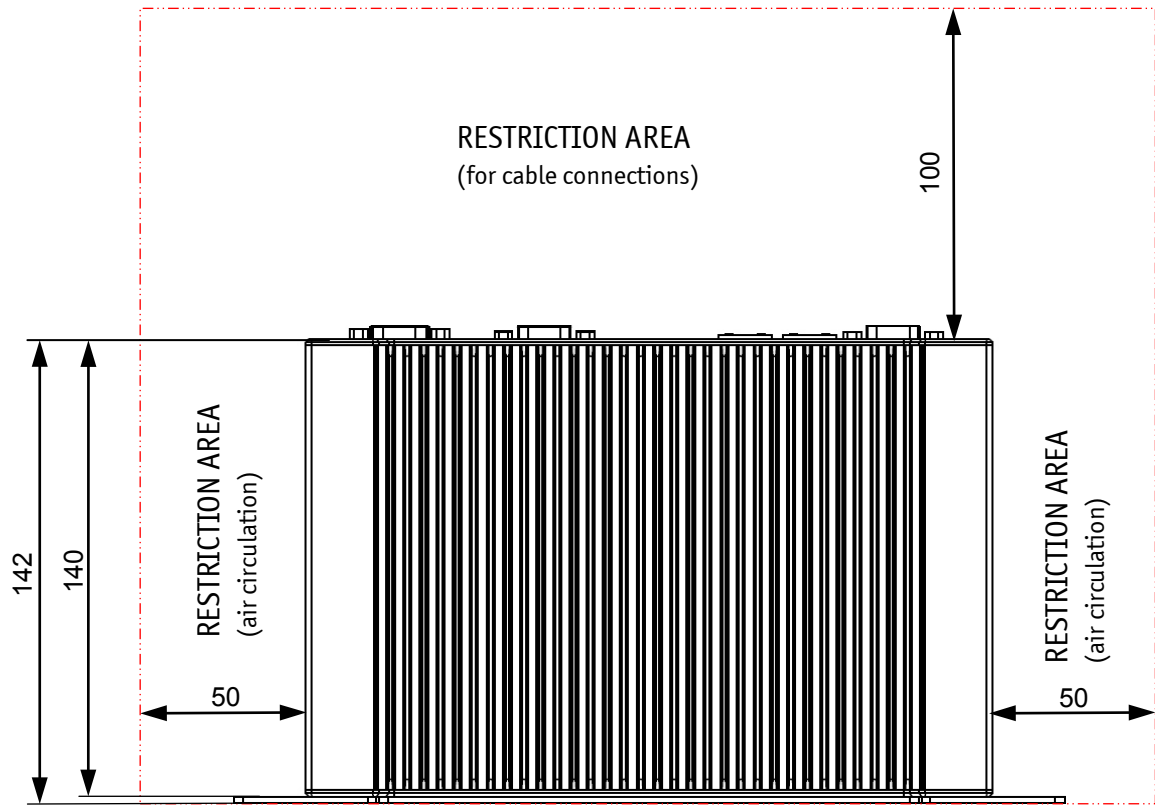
Dimensions in side view when using the bracket for cabinet mounting (side with cooling fins)
